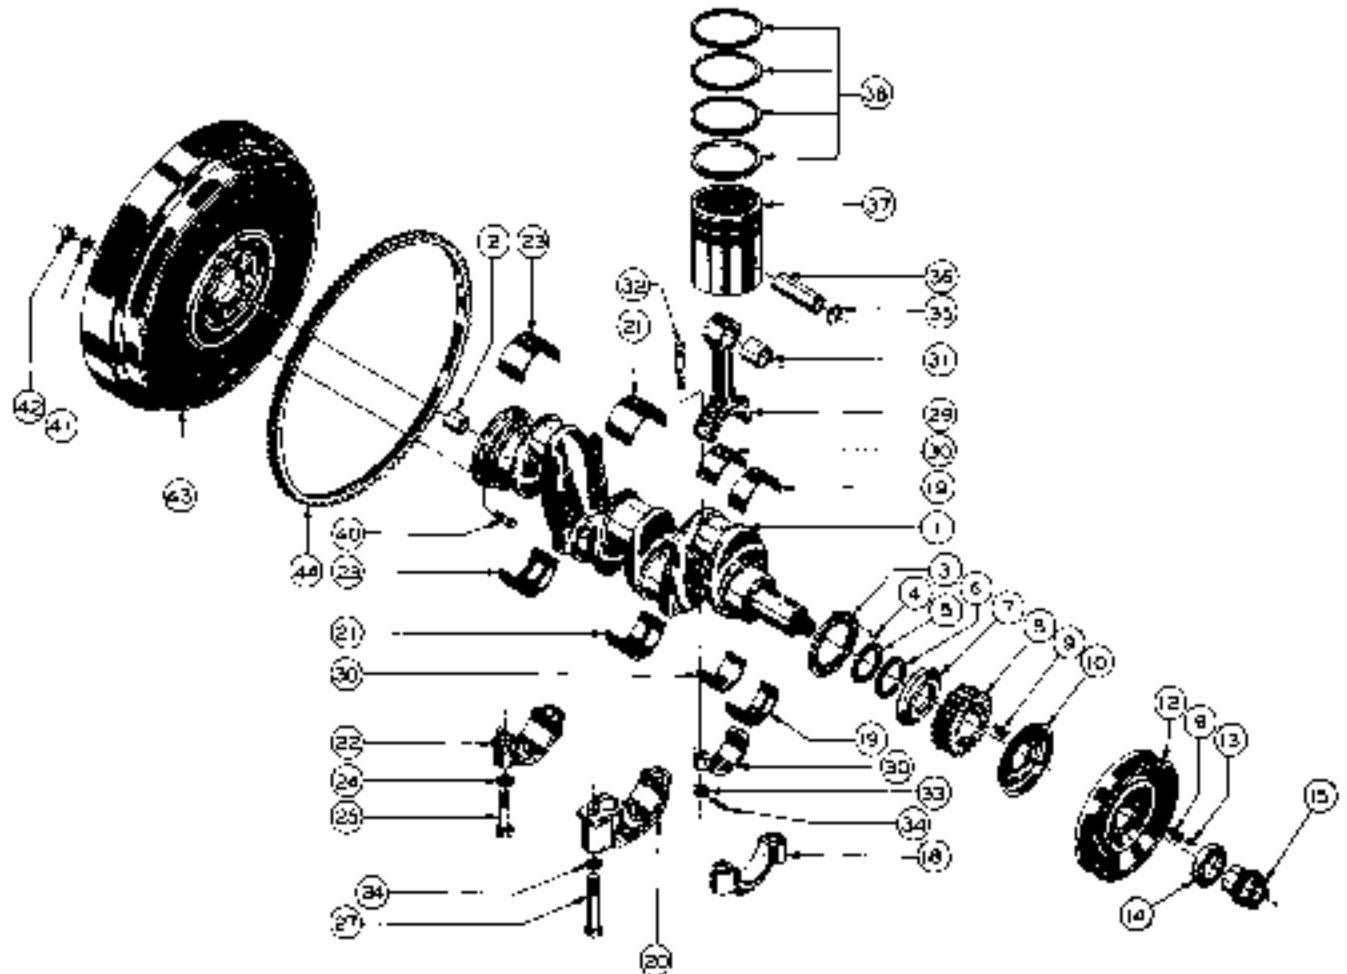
CRANKSHAFT, FLYWHEEL, CONN. RODS AND PISTONS
